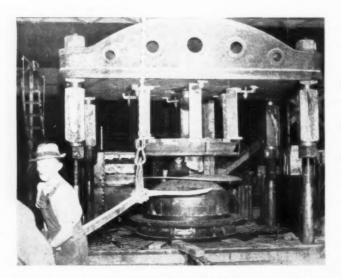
Circular head plate is removed from furnace and placed on die of hydraulic head press
